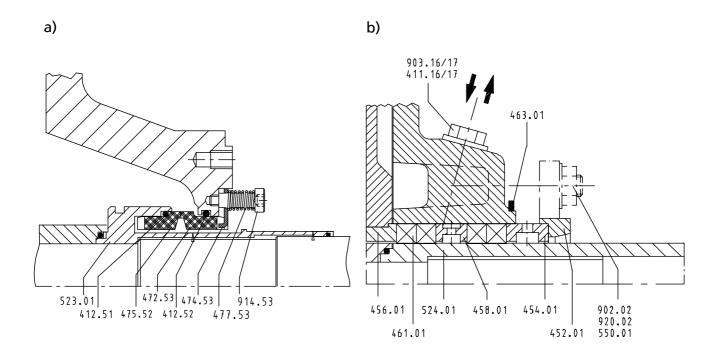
a) 4K mechanical seal; b) coolable gland packing
